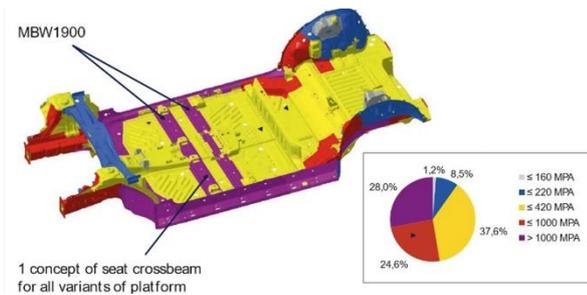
Sheets used in the Volkswagen ID.3 platform's floor structure [50]
